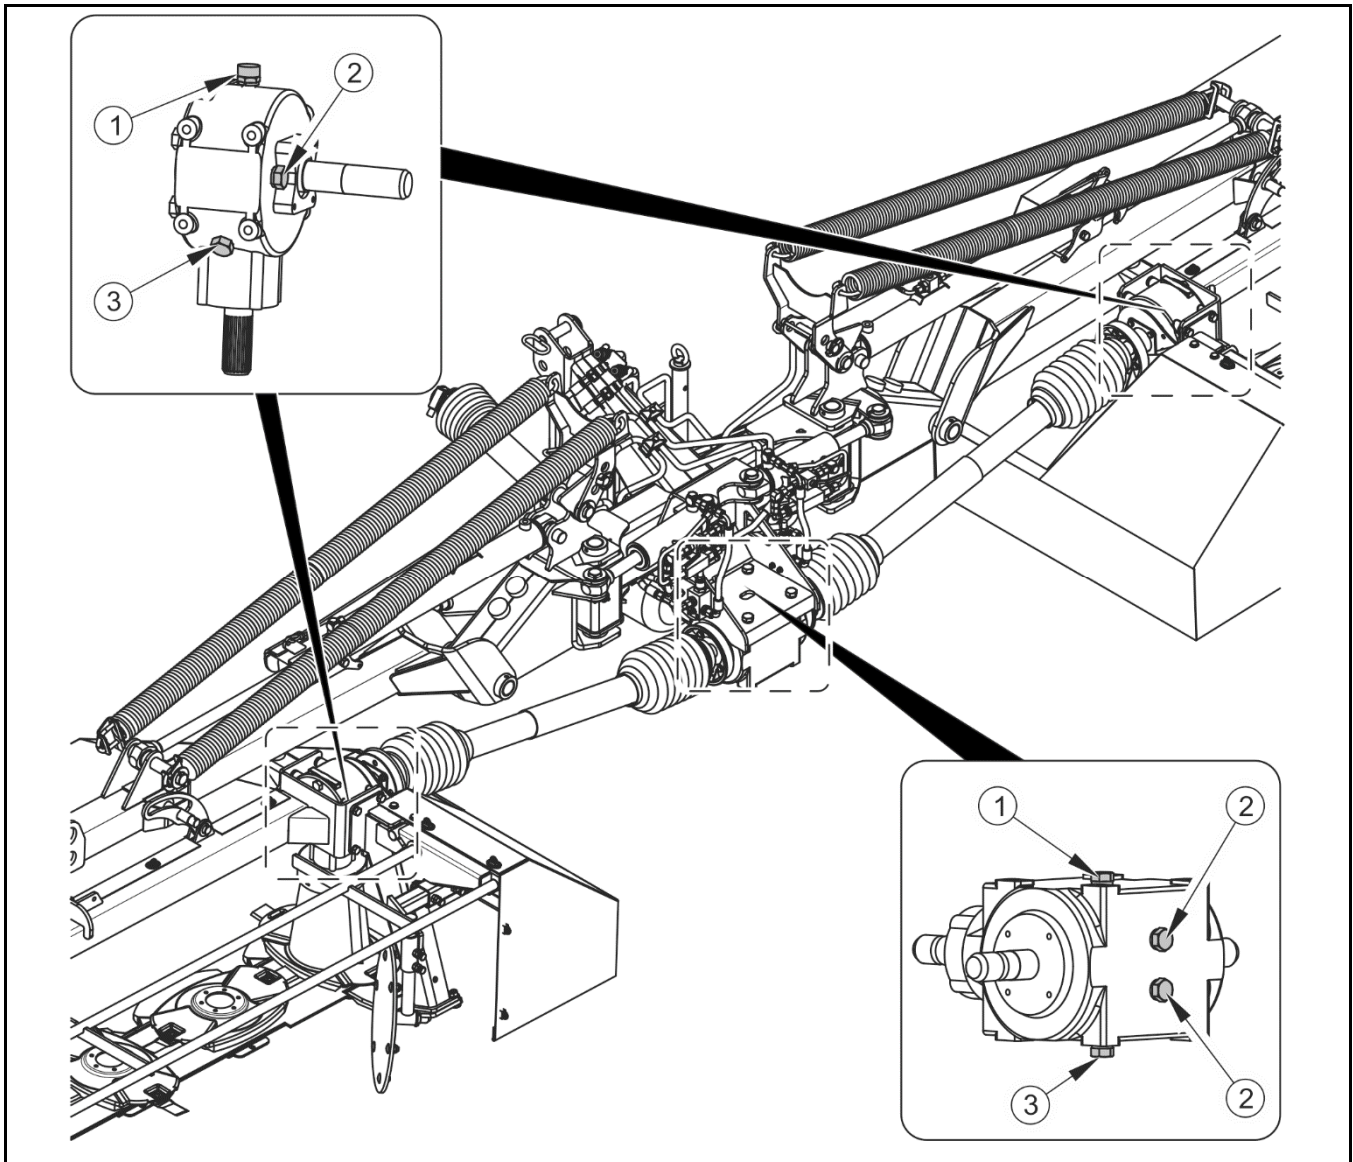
Location and inspection points of intersecting axis gears
